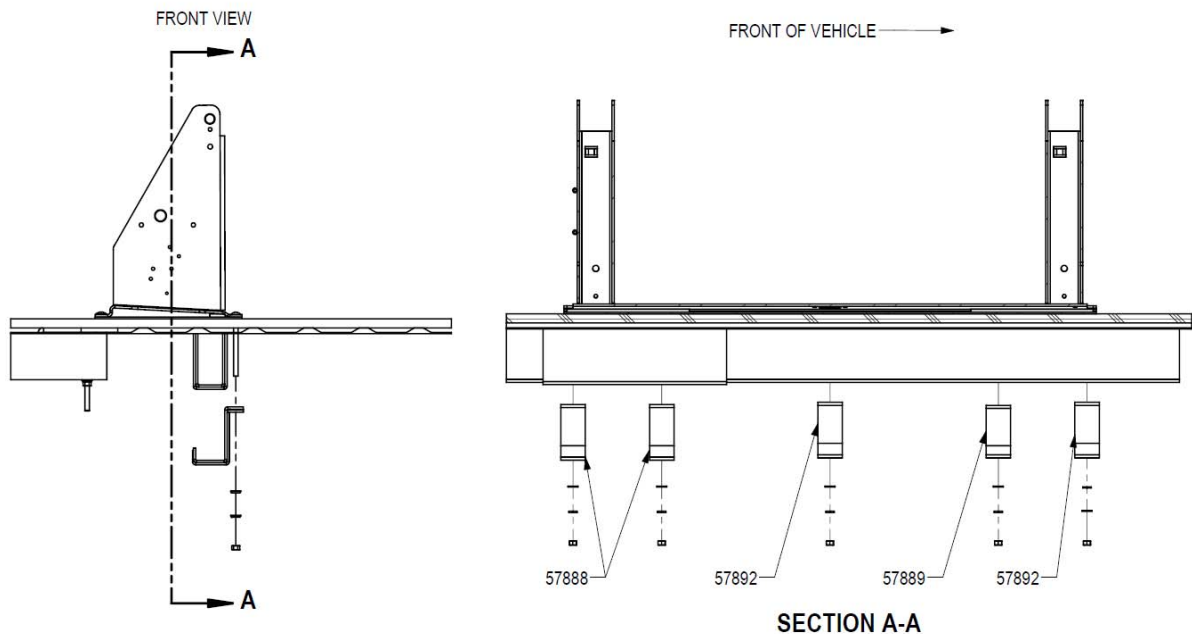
REINFORCEMENT BRACKET INSTALLATION
